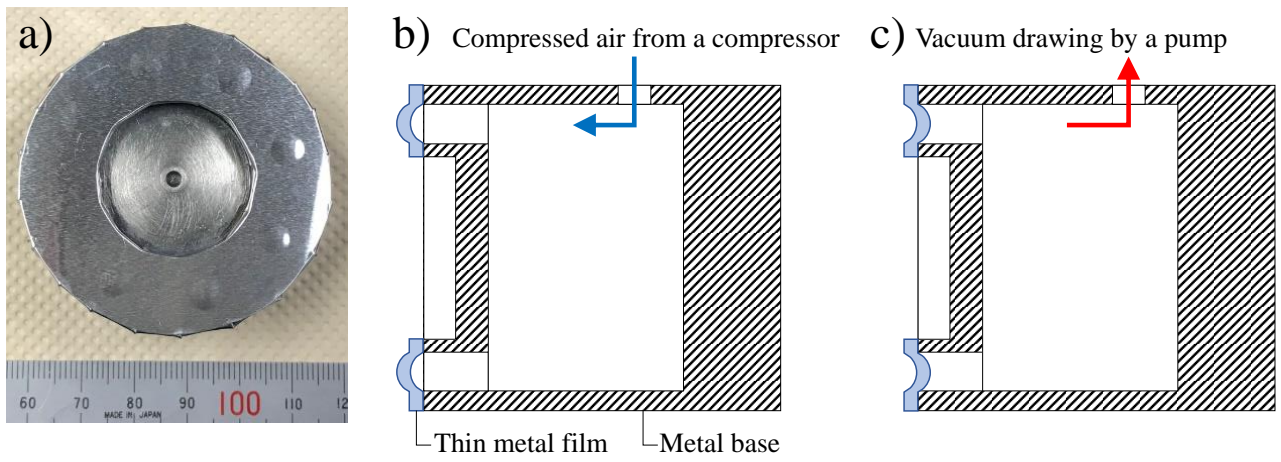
(a) Photo image, and cross-section schematics of the metal morphing surface specimen with (b) convex and (c) concave shape.
